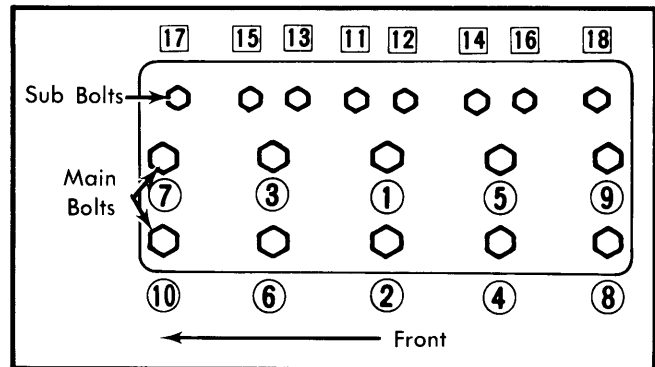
Cylinder Head Tightening Sequence (Remove in Reverse Order)
